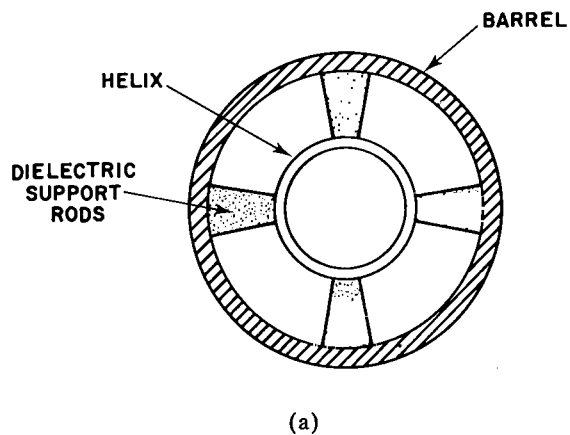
Cross-sectional views of helix traveling wave tubes
